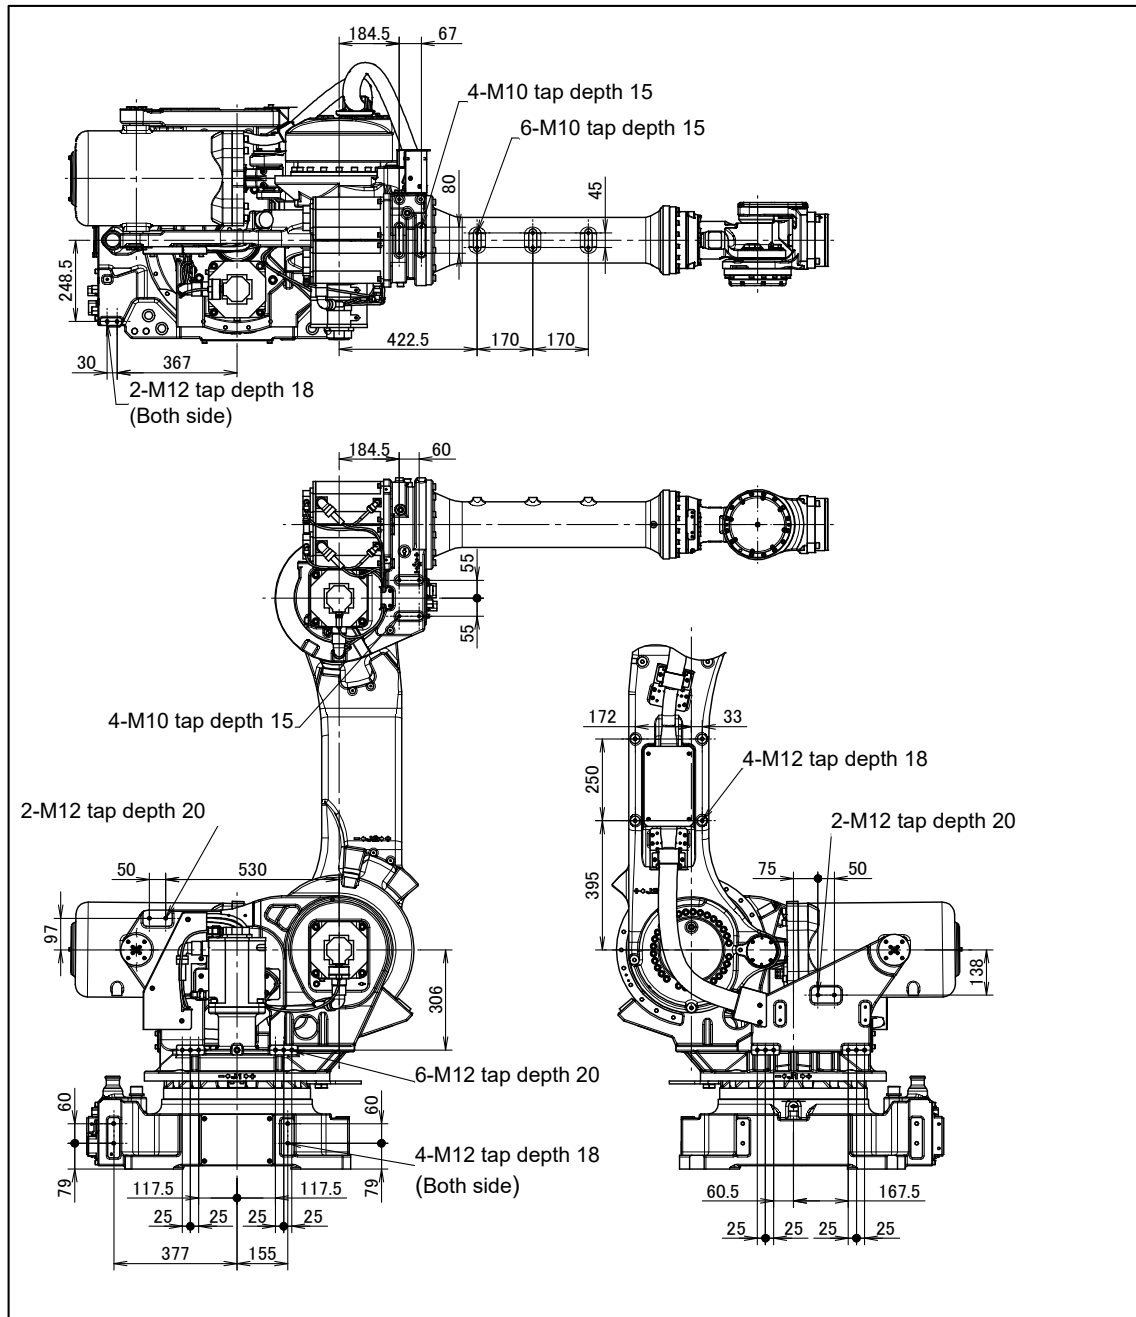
(a) Equipment mounting faces (R-2000iB/165F/210F/250F/150U/220U)
